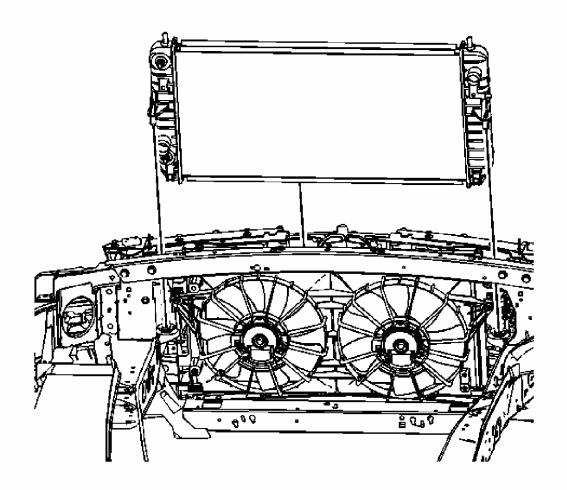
Removing/Installing Radiator Courtesy of GENERAL MOTORS CORP.
